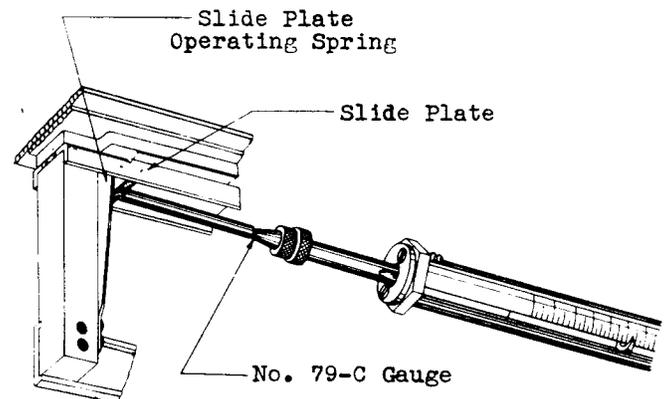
Method of Gauging Slide Plate Operating Spring Tension
